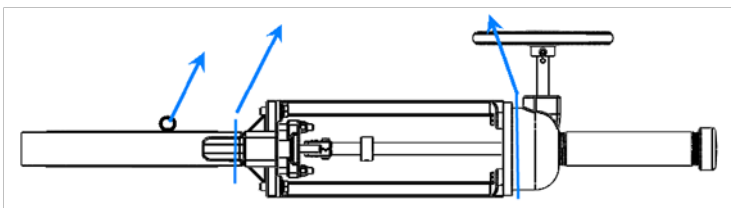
Knife Gate Valve with Bevel Gear Actuator, Horizontal Lifting
